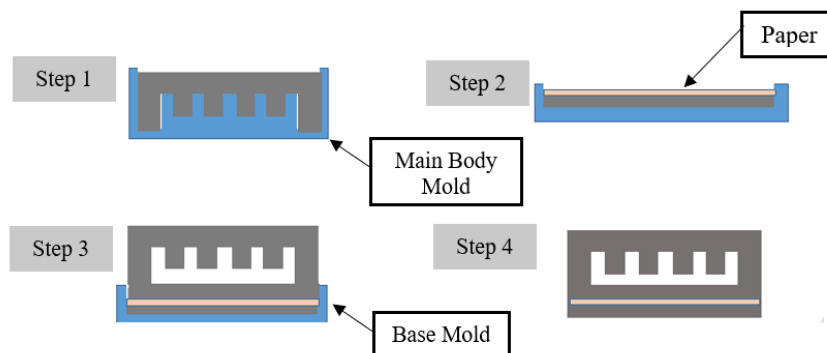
Four (4) step procedures for assembly process of inchworm soft crawling robot
